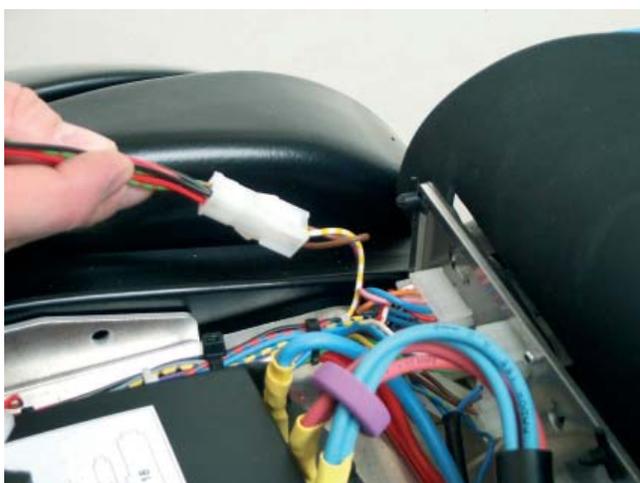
Remove the existing four-pin plug from the PCB. Attach one of the plugs from the hour counter.
